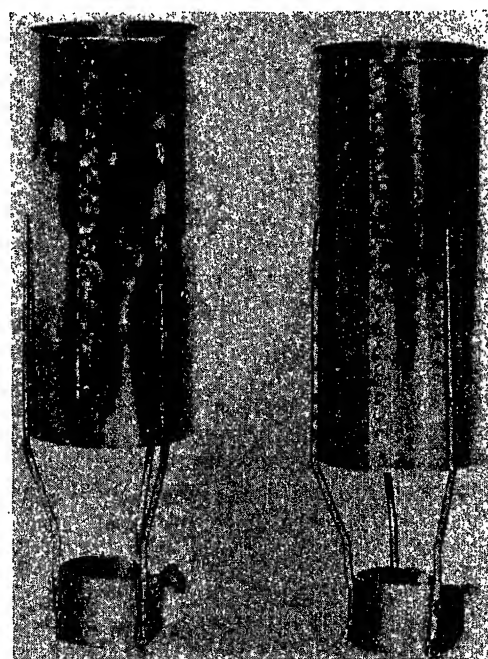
SPECIAL GRID ASSEMBLY (LEFT) WELDED ON MANUALLY CONTROLLED WELDER (RIGHT) WELDING IN $\frac{1}{2}$ CYCLE
